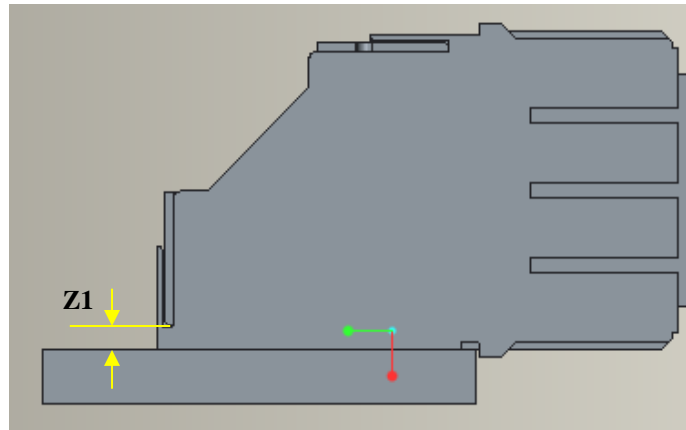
Height from the lowest surface of the stiffener to the PCB surface [Z1]
